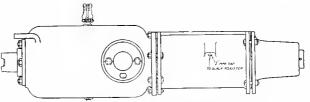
8-in. x 12-in. Car Brake Cylinder and Auxiliary Reservoir Combined.
